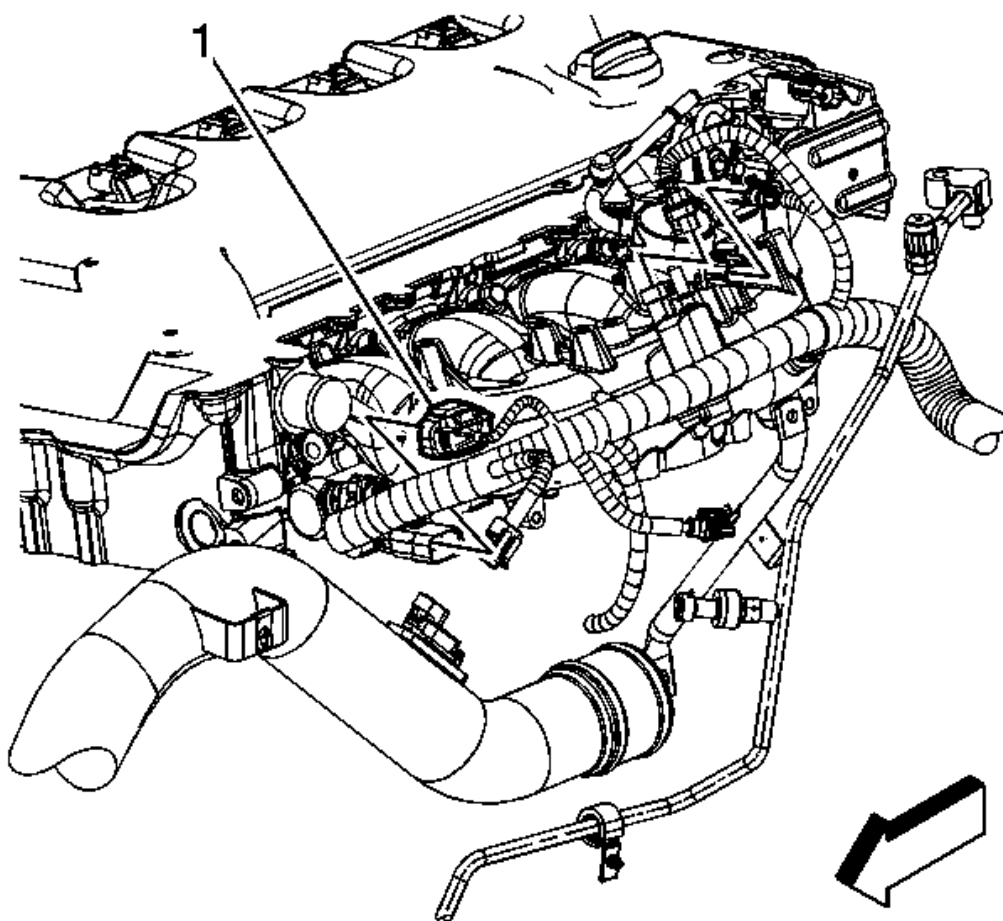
View Of Engine Wiring Harness Connector & Fuel Injector Wiring Harness Connector
